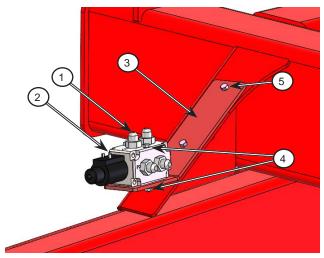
Fasten the ESV onto the mounting bracket (RH side shown)
